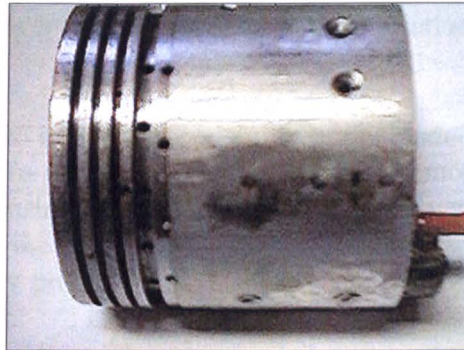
Rebate Screw Holes for Fastening Electronic Module to Piston
